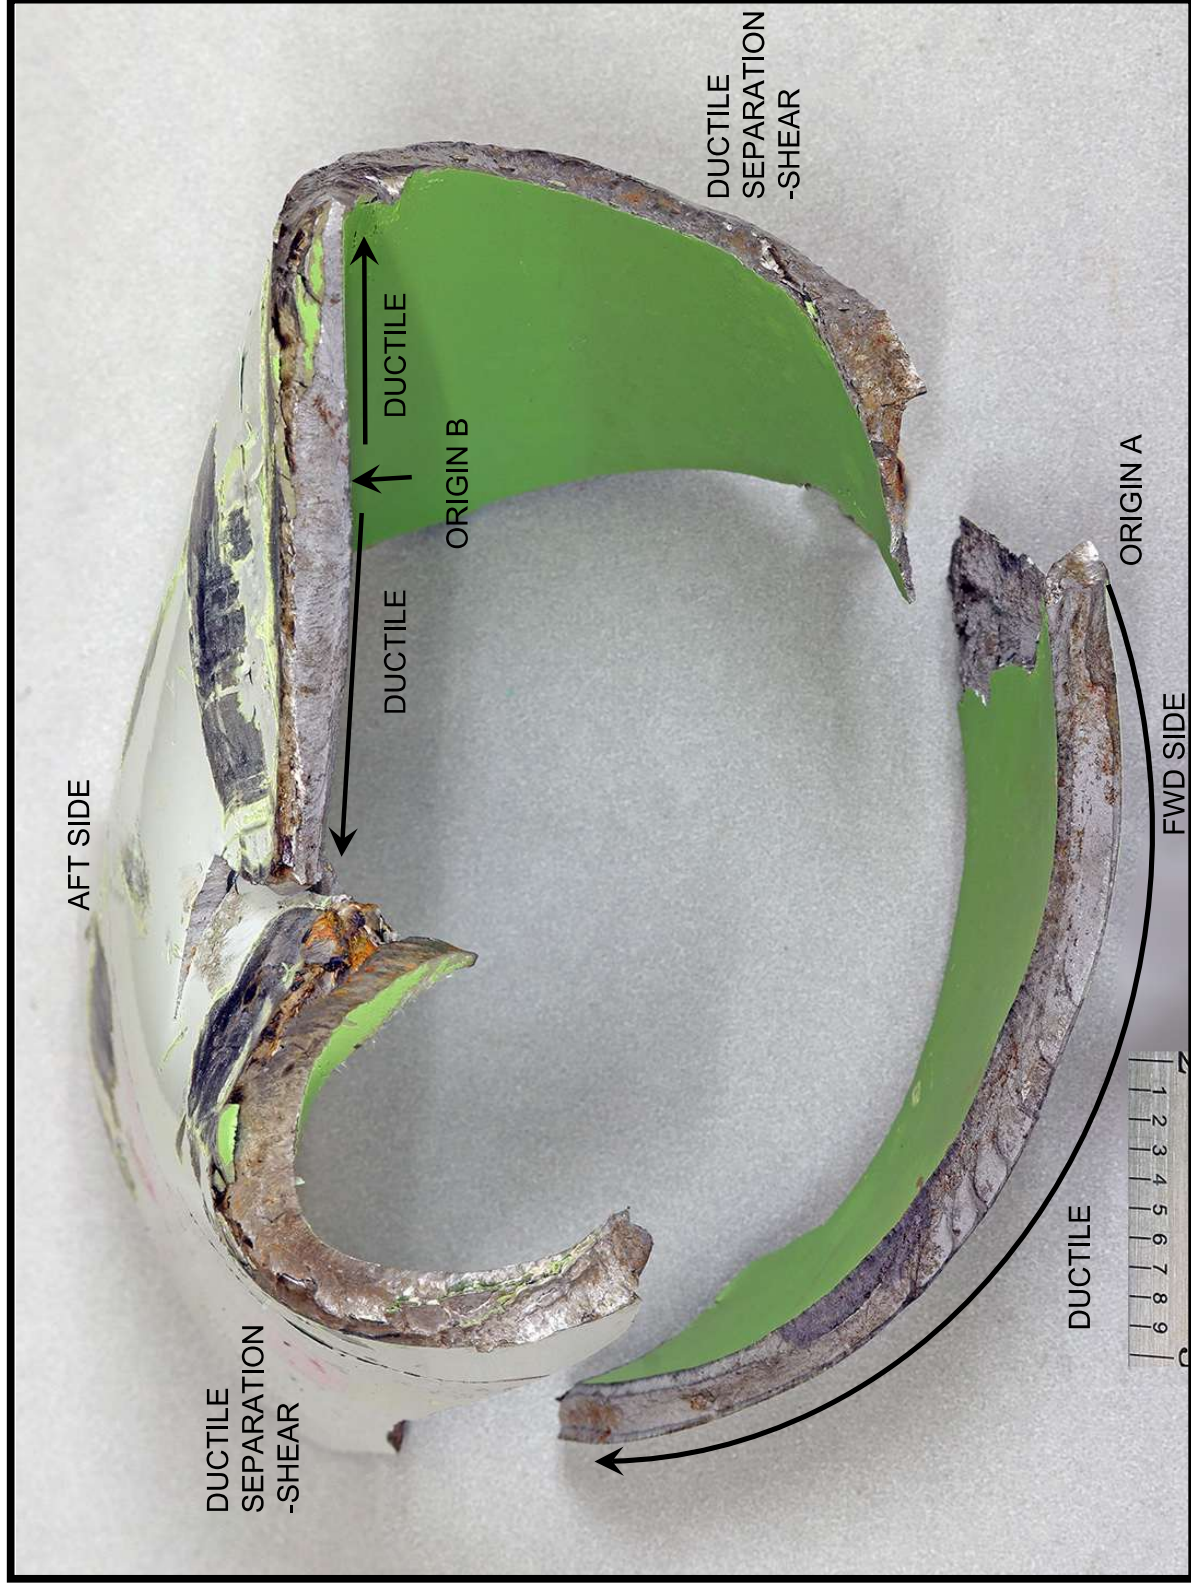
View of Upper Drag Strut- Transverse Fracture. IG=Intergranular separation.
